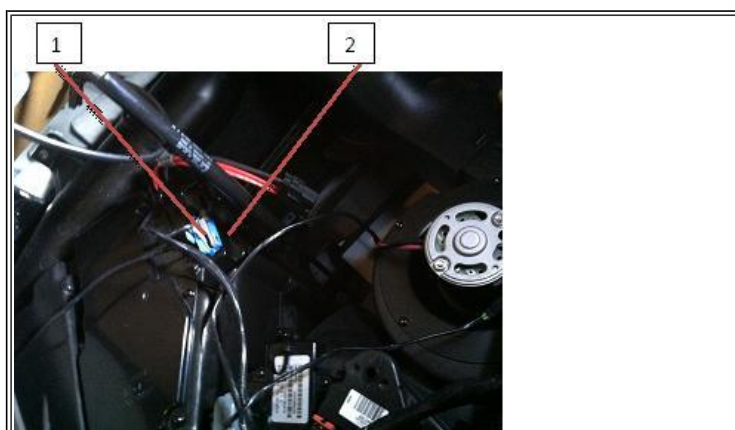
Control Center Assembly Harness 32-Pin Connector.
